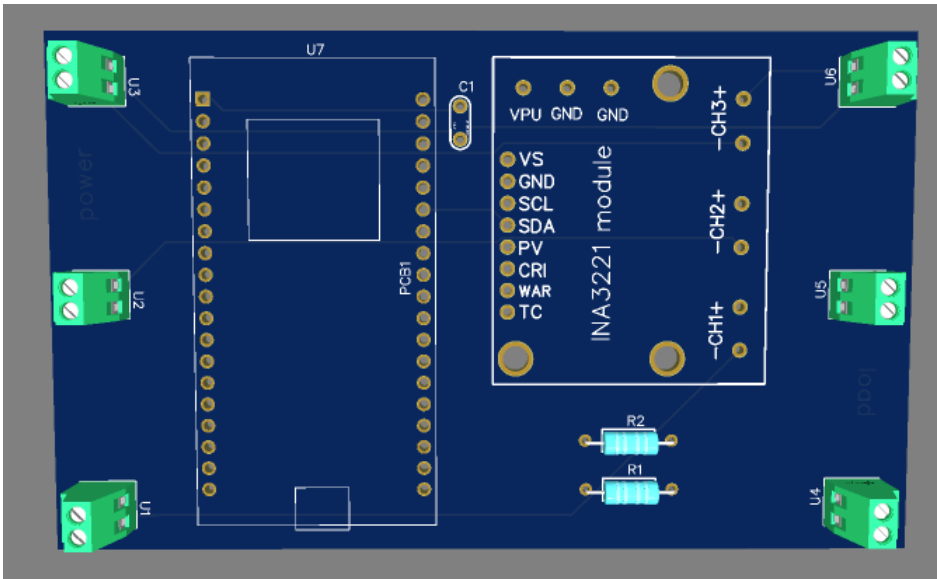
Power Monitoring Board PCB Layout for Dubomini 2.0
